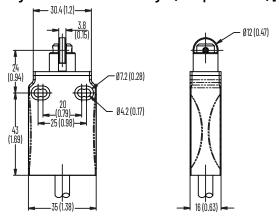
Cross Roller Plunger (Panel Mount) [mm (in.)]
